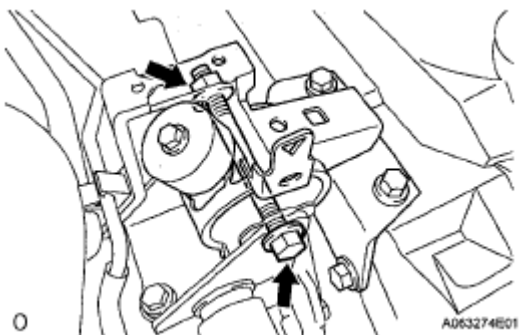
Identifying Engine Mounting Insulator LH With Through Bolt And Nut
